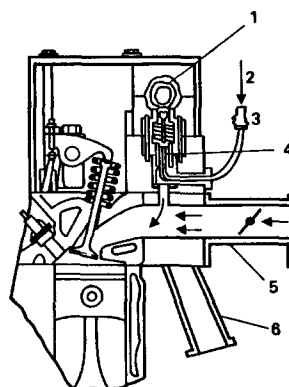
A diagram of a valve mechanism to feed hydrogen: 1 = cam; 2 = hydrogen; 3 = hydrogen pipeline insulation; 4 = valve; 5 = intake manifold; 6 = exhaust manifold.
